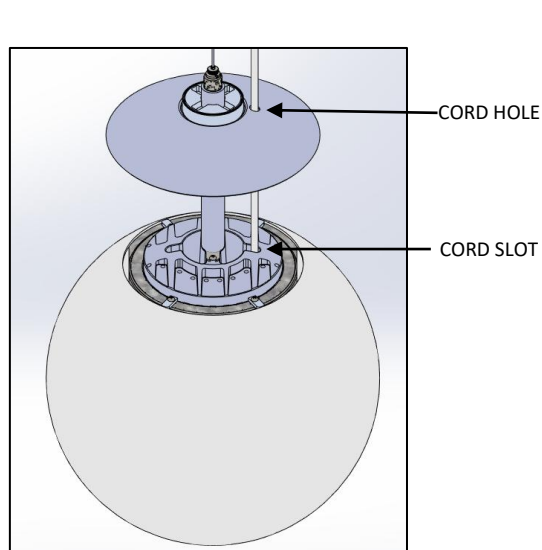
FITTER AND TOP COVER INSTALLATION
